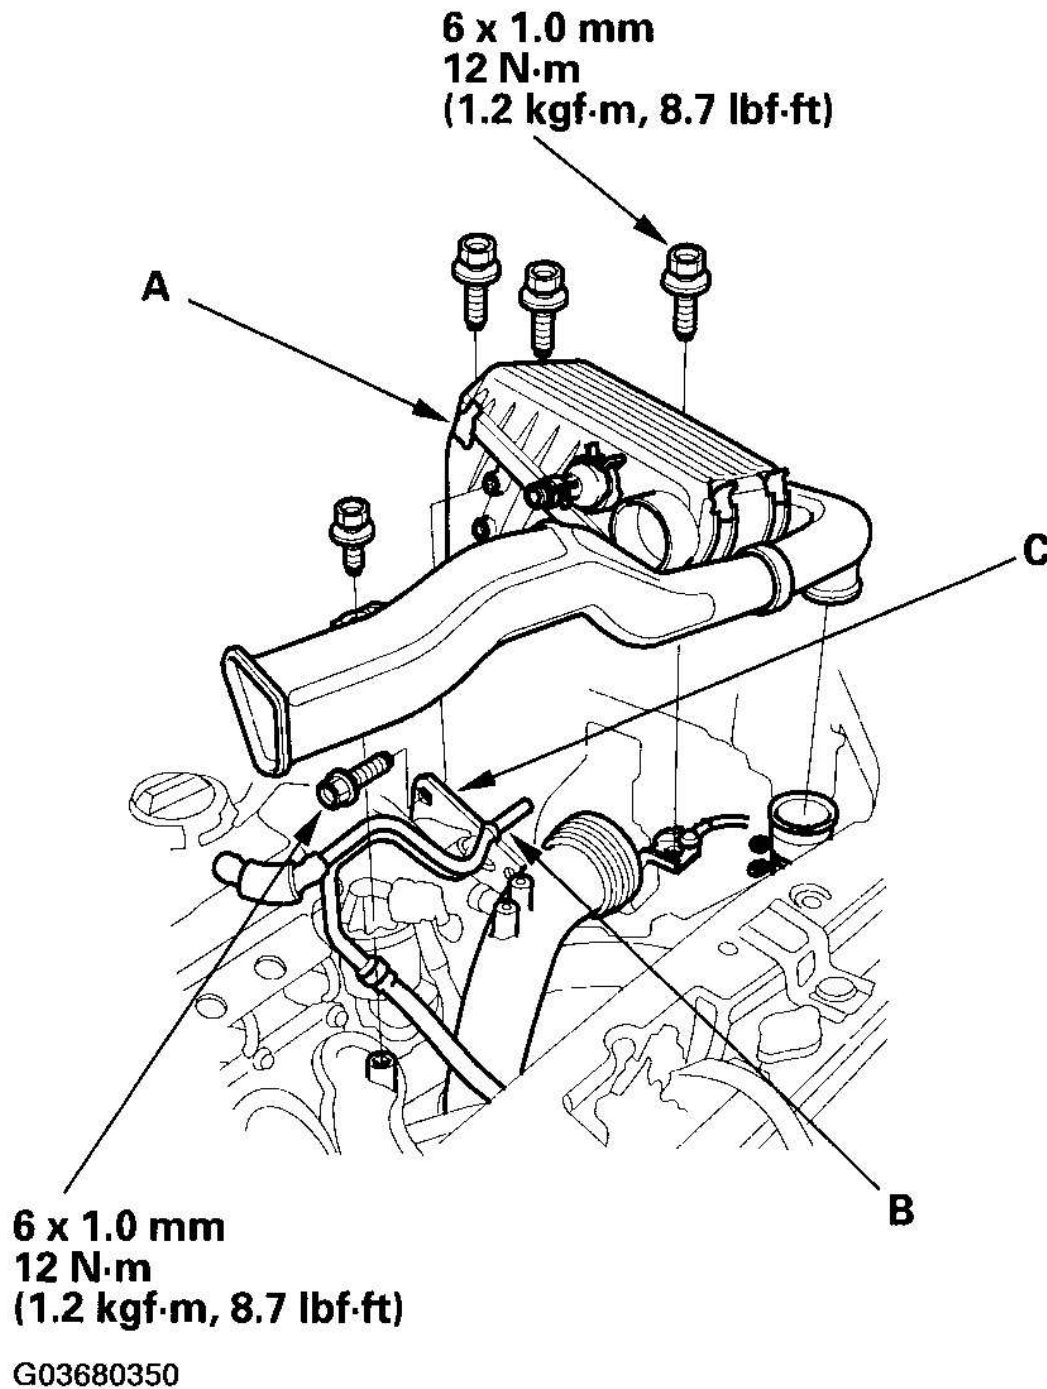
Installing Evaporative Emission (EVAP) Canister Hose And Brake Booster Vacuum Hose
